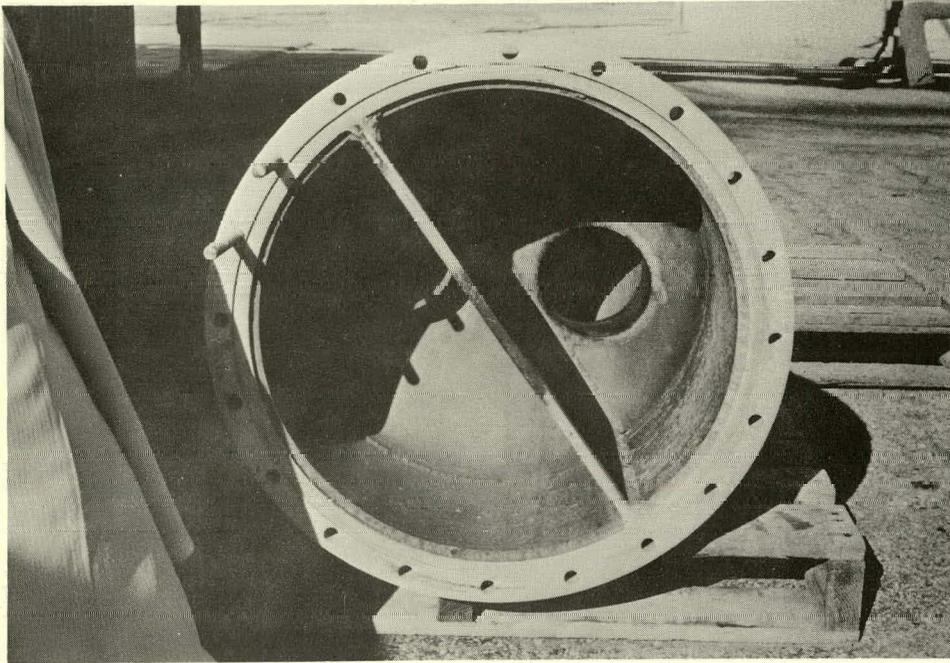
Appearance of Heat-removal Condenser Water Box. (A) Inlet, (B) discharge, and (C) steel blank and bolts.
